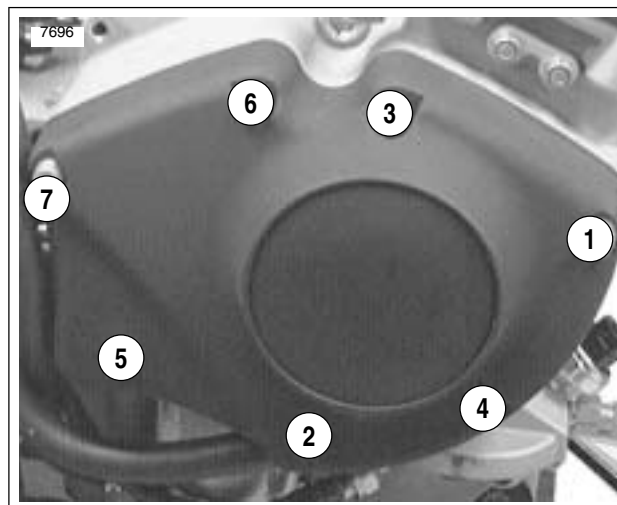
Gearcase Cover Mounting Screw Torque Sequence
